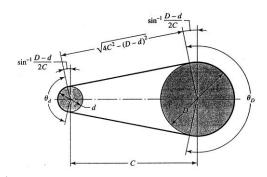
Belt geometry Source : Shigley [11], *Mechanical Engineering Design*. 7th edition.
